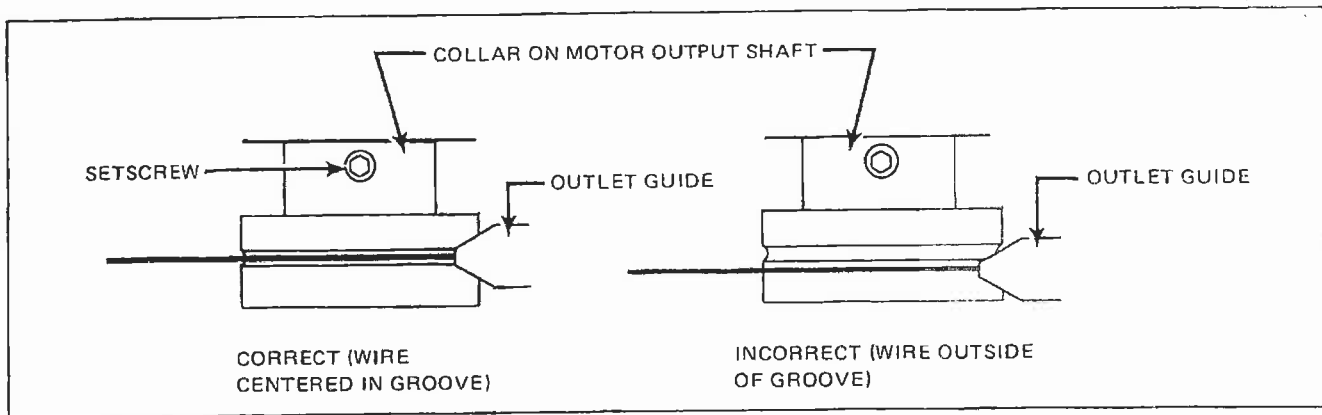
Welding Wire - Feed Roll Alignment
